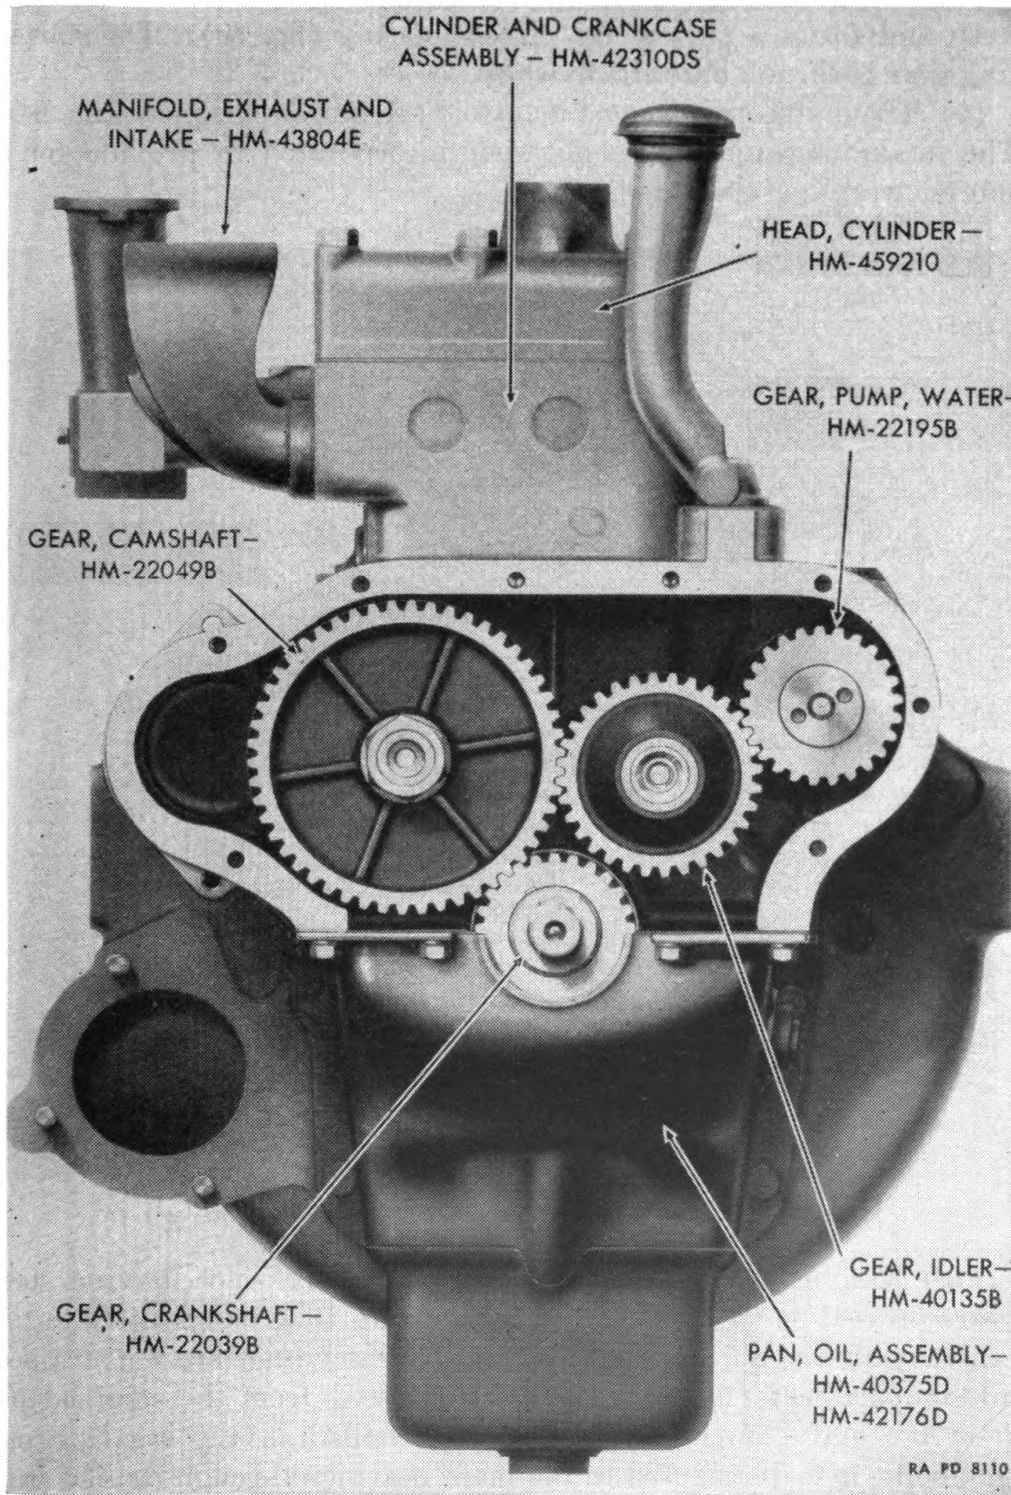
Gasoline engine, sectionalized, front elevation.
